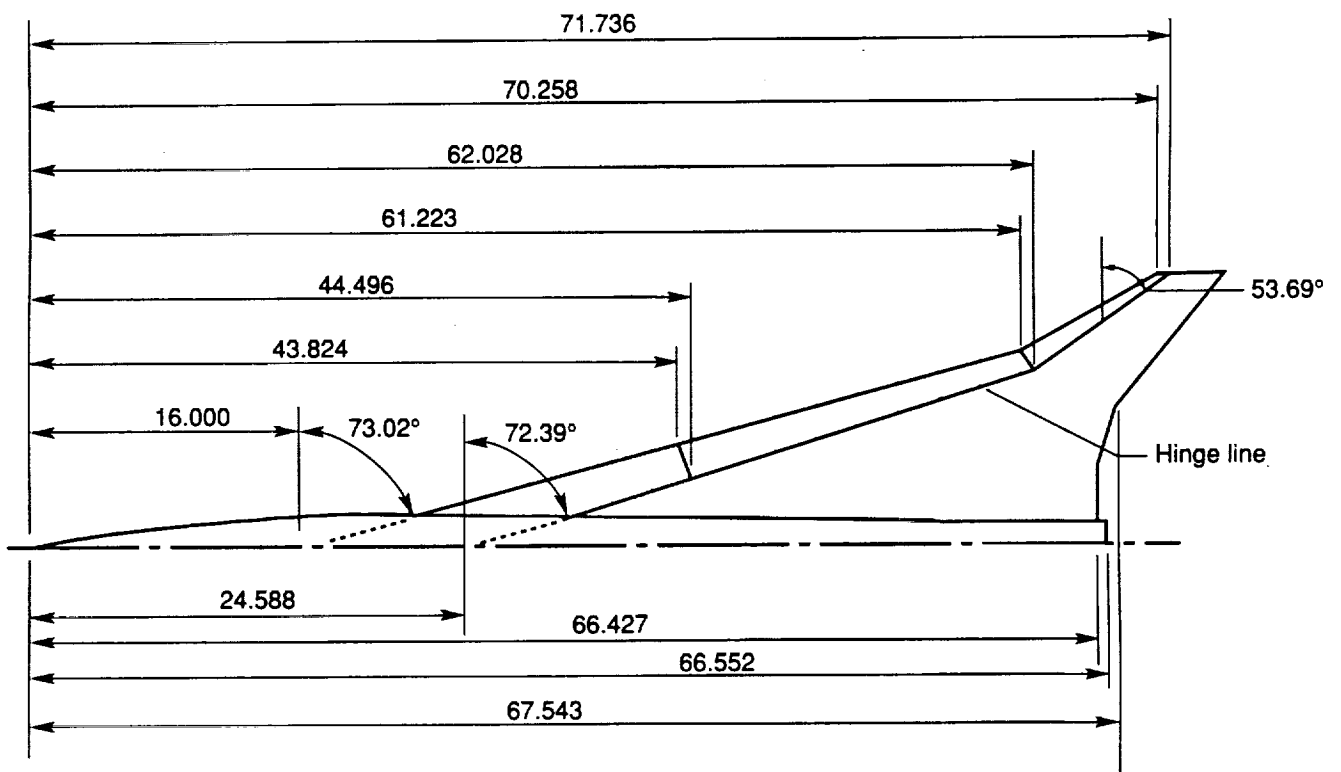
Details of leading-edge flap system. Dimensions are given in inches.
